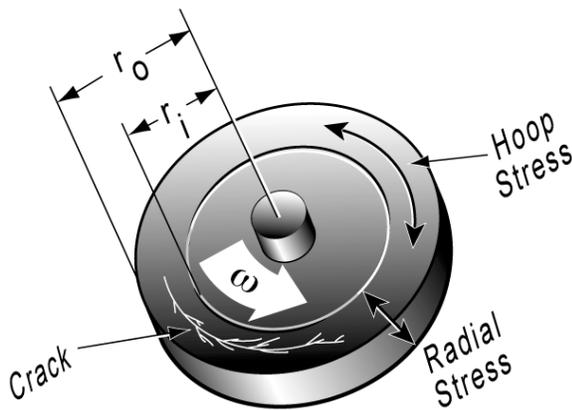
Circumferential Cracks Propagating Near the Outer Edge of a Hollow, Cylindrical Rotor Made from a Fiber-Reinforced Elastomer.
